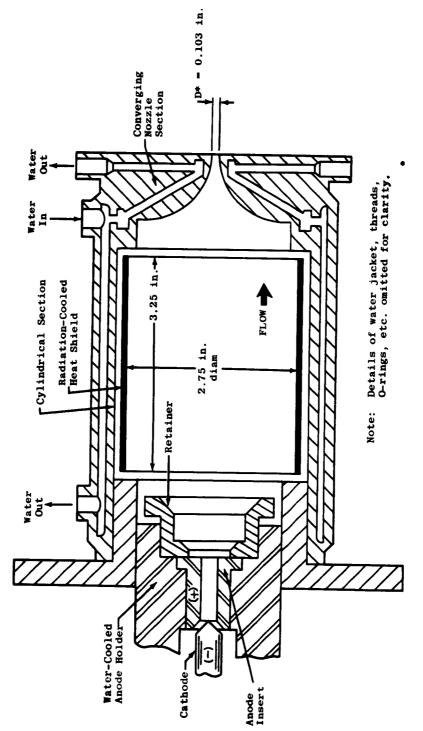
Typical Electrode - Stilling Chamber - Heat Shield Configuration
